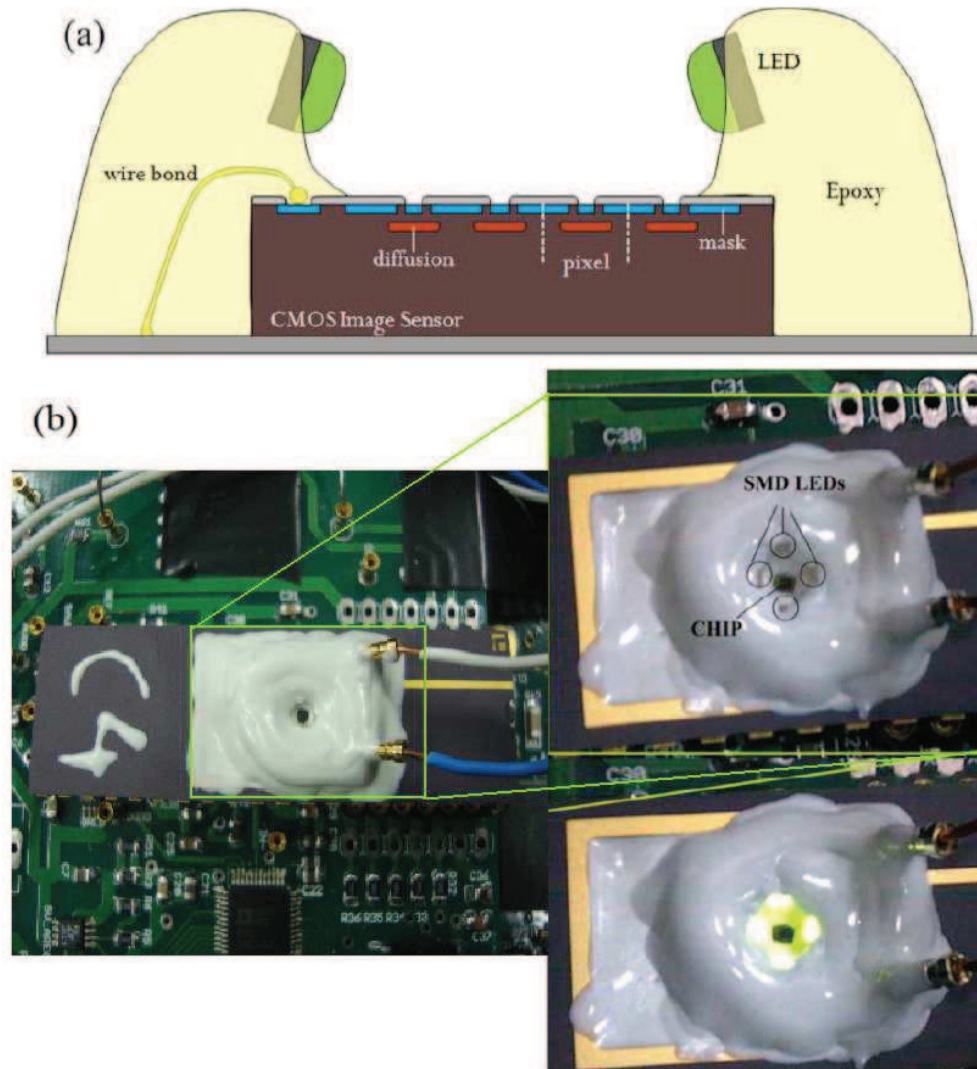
(a) Cross-section view of the sensor package, (b) Top view photograph of the sensor package.
